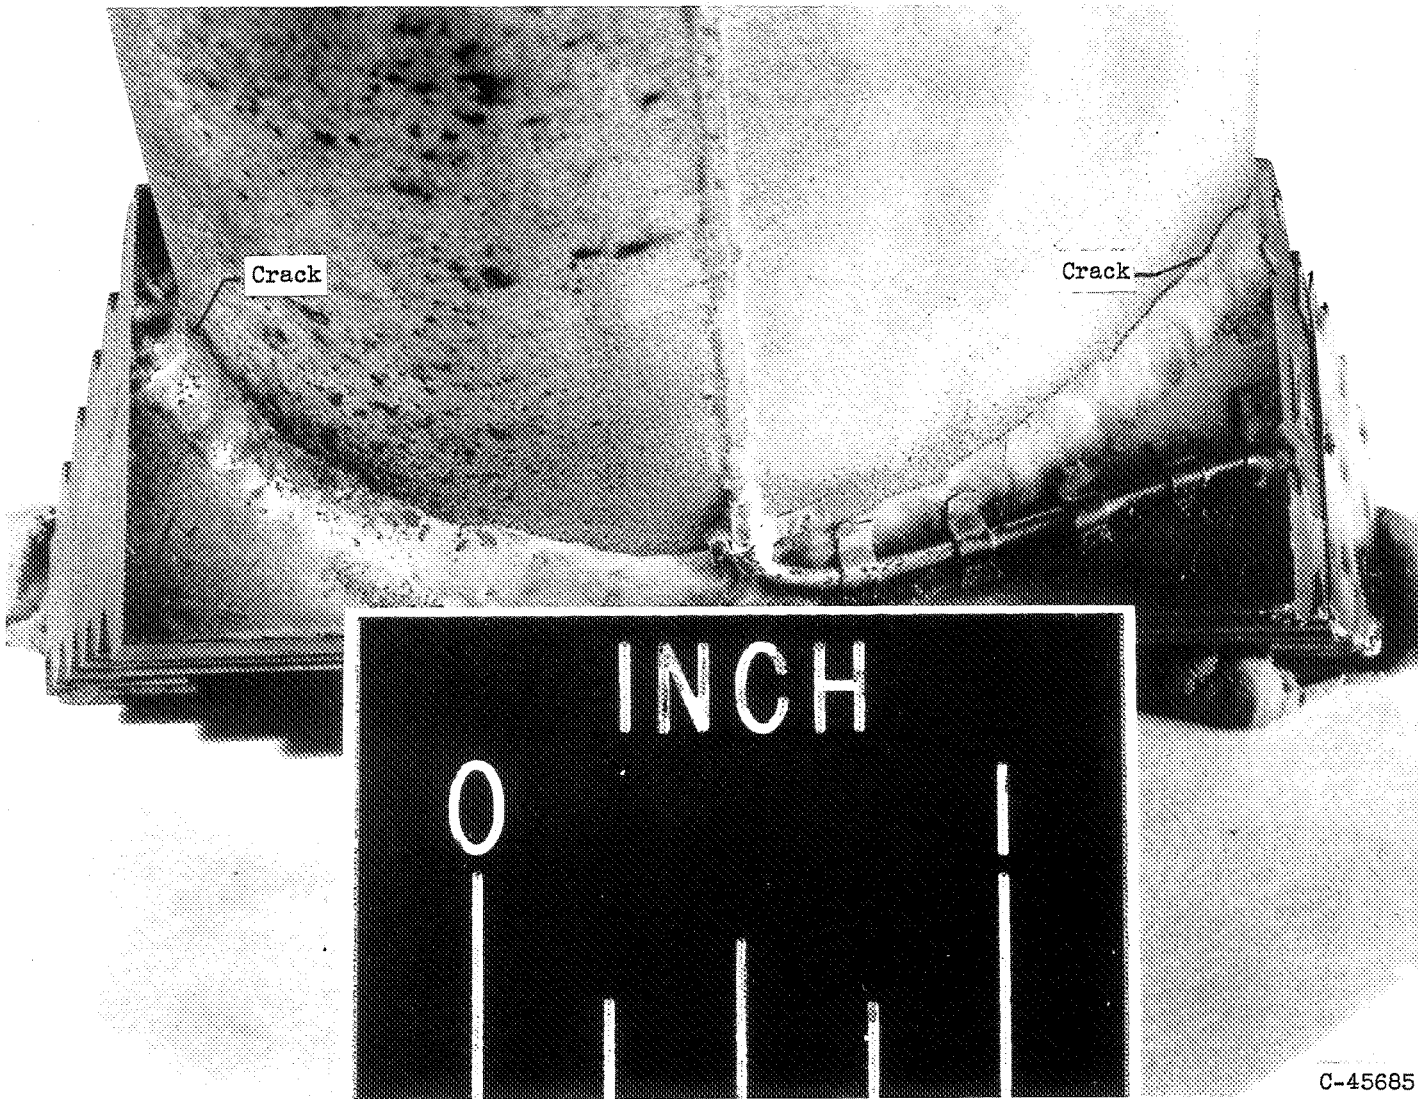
Crack at junction of porous shell and fillet weld on blade 24.
